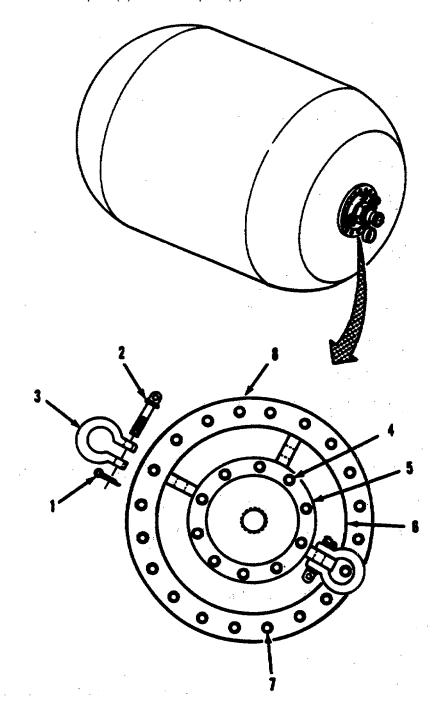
Shackles, Bearing, Swivel, and Closure Plate Replacement.
